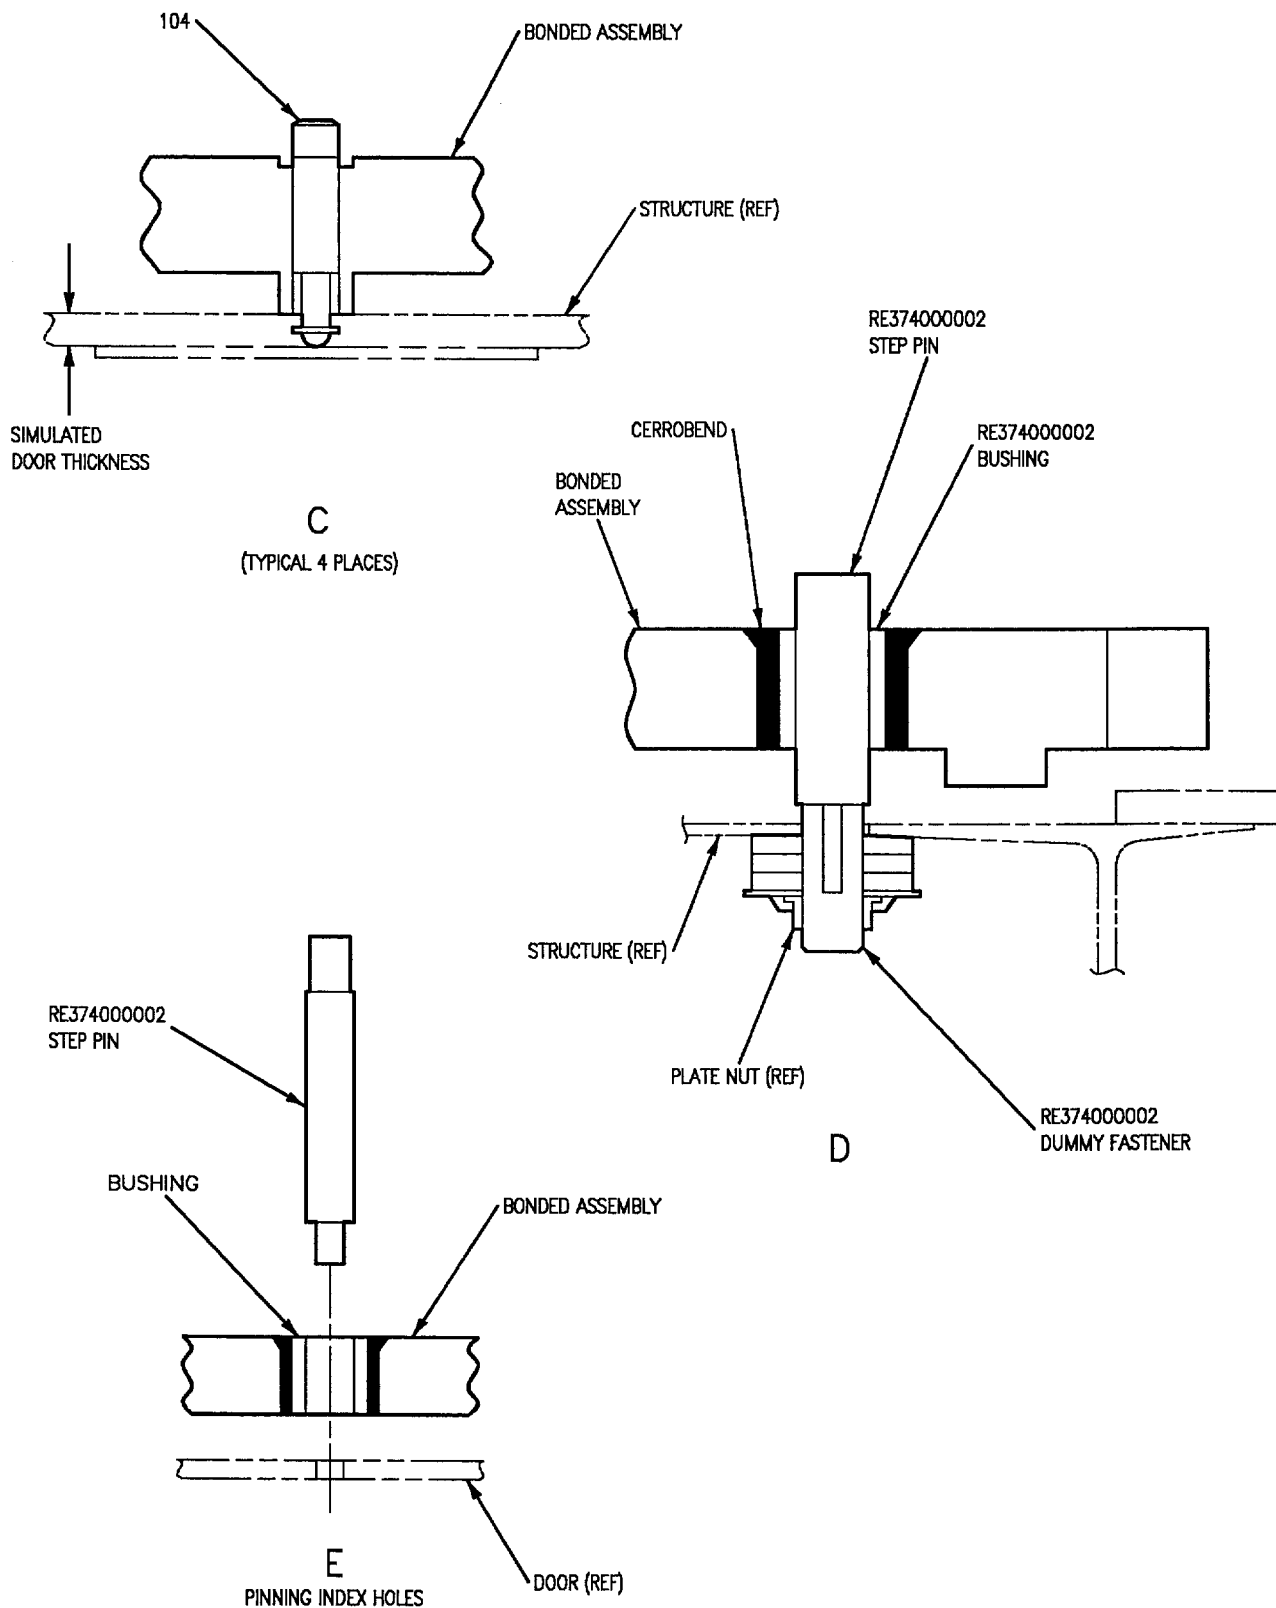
Installation of Plate Set for Drilling Door 84 (Sheet 2)
